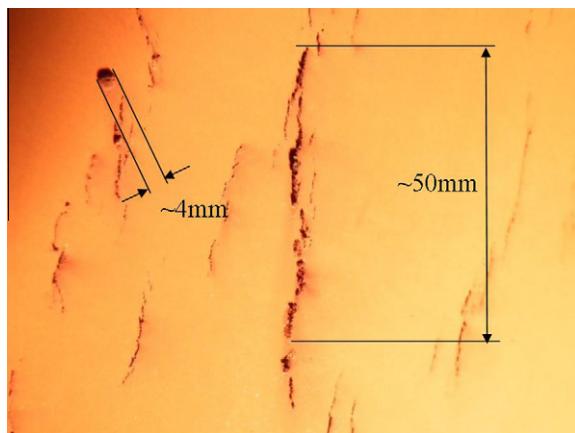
Examples of corrosive attack of the cylindrical part of the tank.
